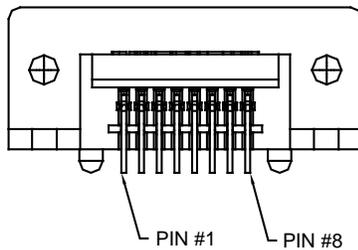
shows the SR4210PCB board-mount receptacle. Refer to spec sheet for dimensions.
